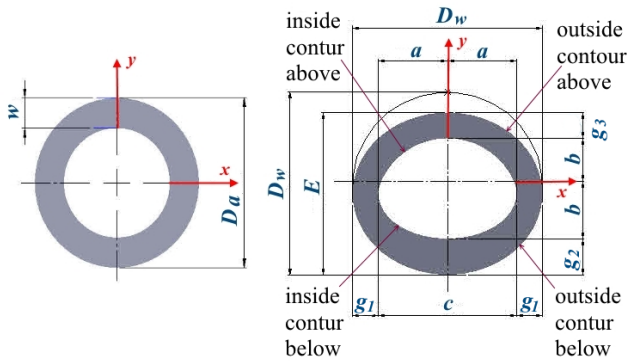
Cross-section of the tubular stabilizer bar in the main radial zone – main geometric parameters
